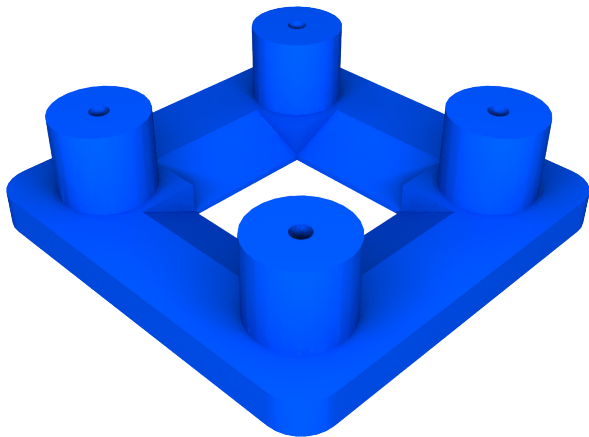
Front cap ray tracing viewed from internal surface. The beveled edges of the opening are designed to allow direct illumination of the specimen, and the cylinders mate with the LED driver holder.
